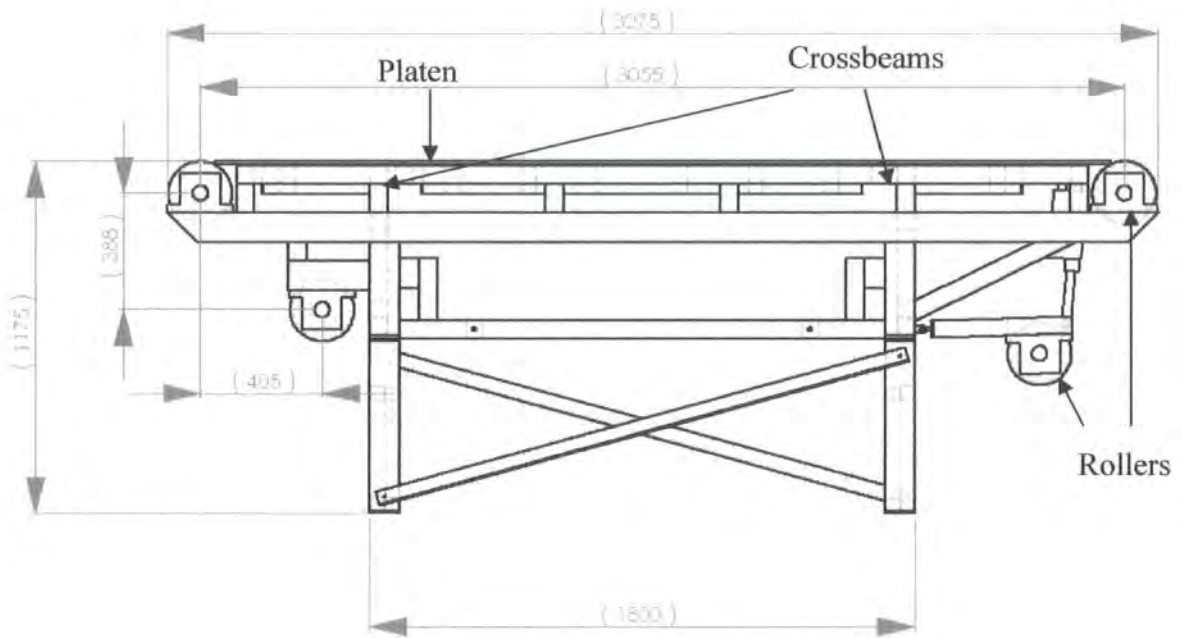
, Rolling road frame (Dimensions in mm)
